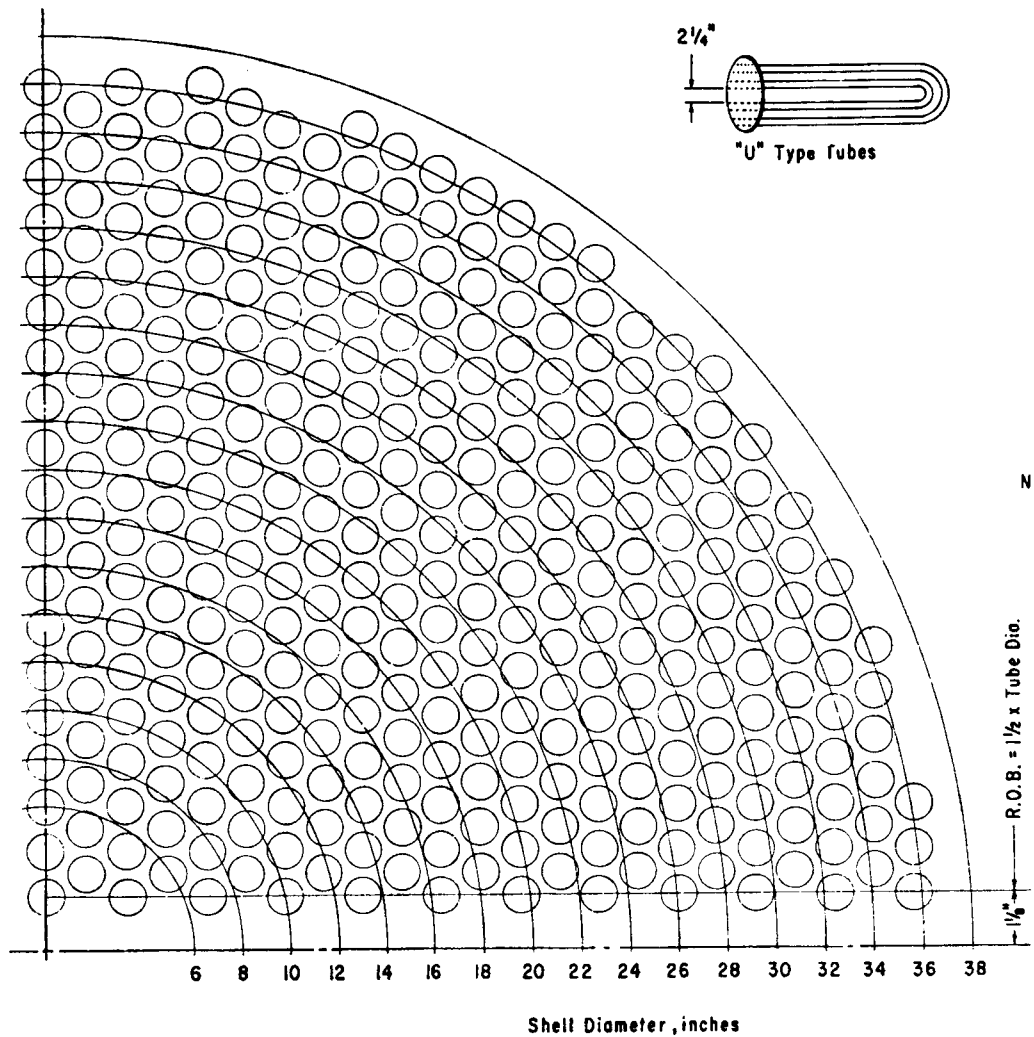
A. Tubesheet layout for U-tube exchanger. Tube passes: two or four. Tube sizes and pitch: 3/4 in. on 5/16 in. Δ. Radius of bend: 2 1/2 × tube diameter.
